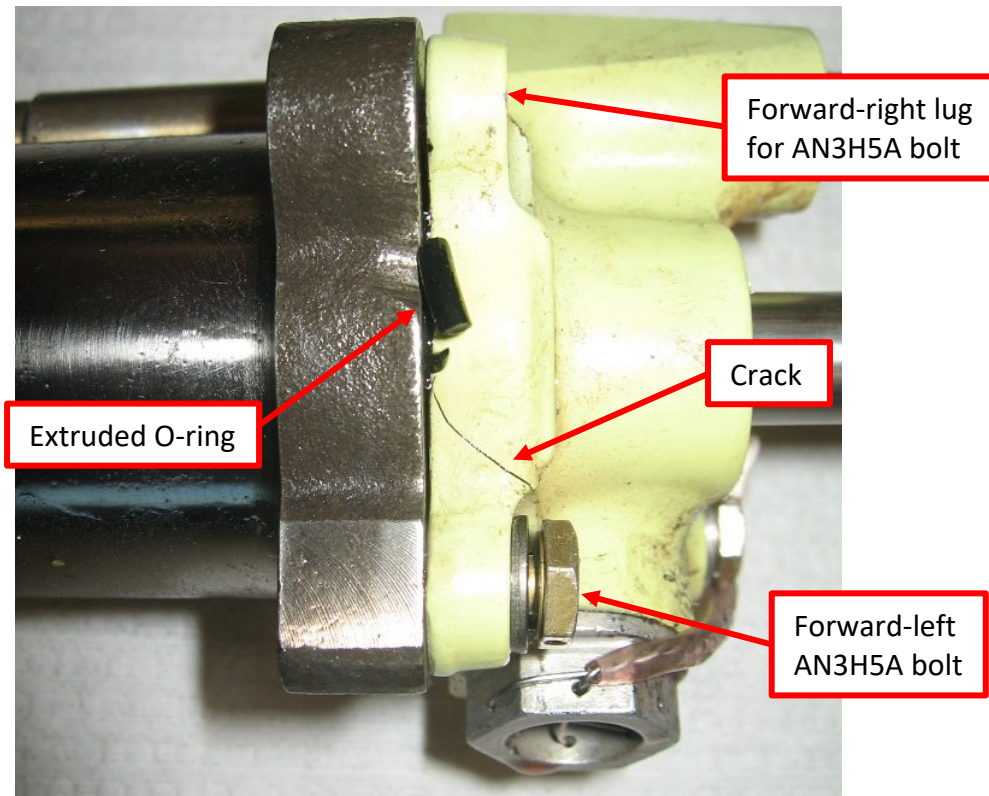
The pedal damper check valve housing still installed on the pedal damper. (Image courtesy of Sikorsky)
